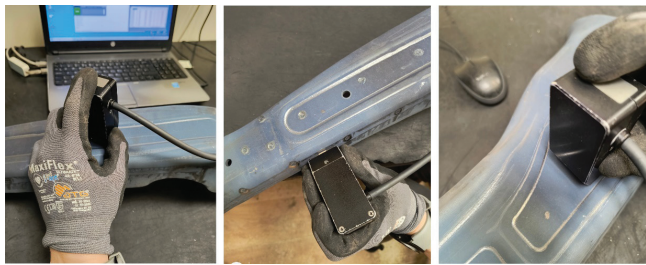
Measurement of the mechanical parameters of the drawpieces
